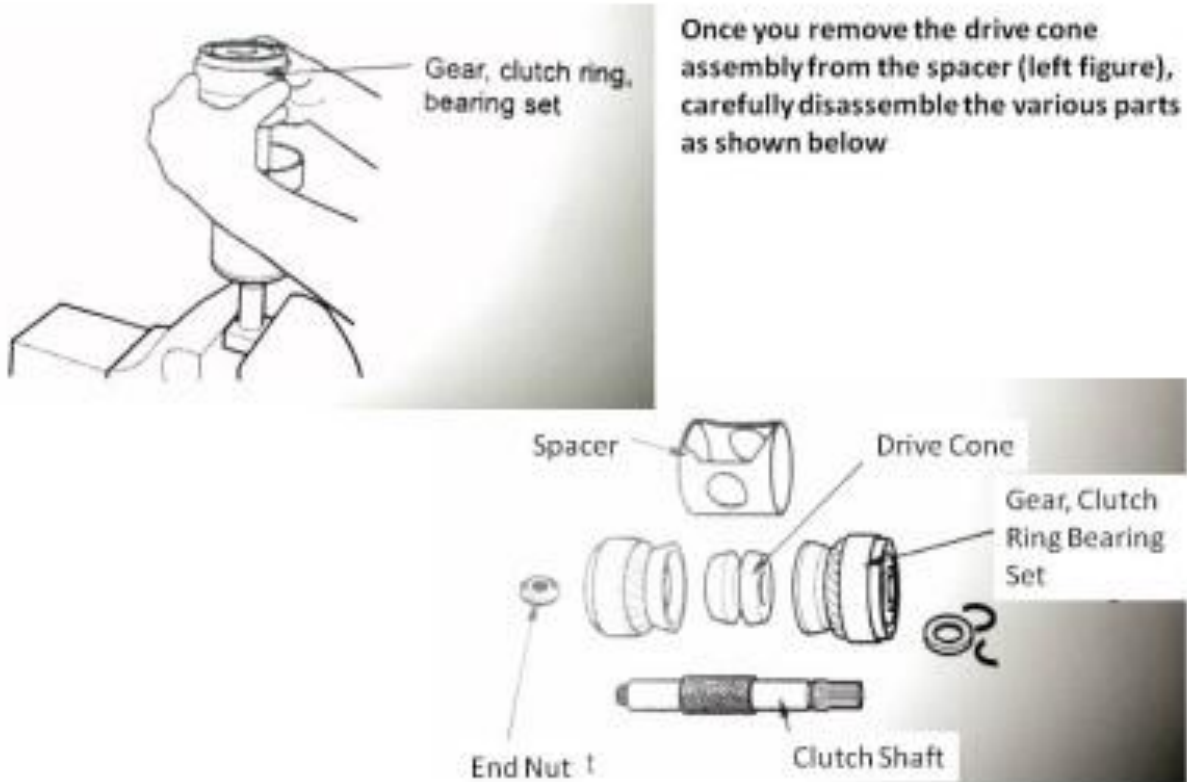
Step 6 Inspecting The Drive Cone And Gear
